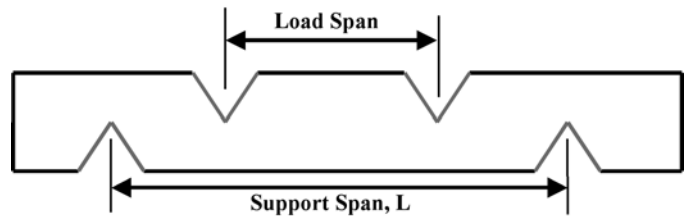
Fixture Used to Align Loading Noses and Supports
